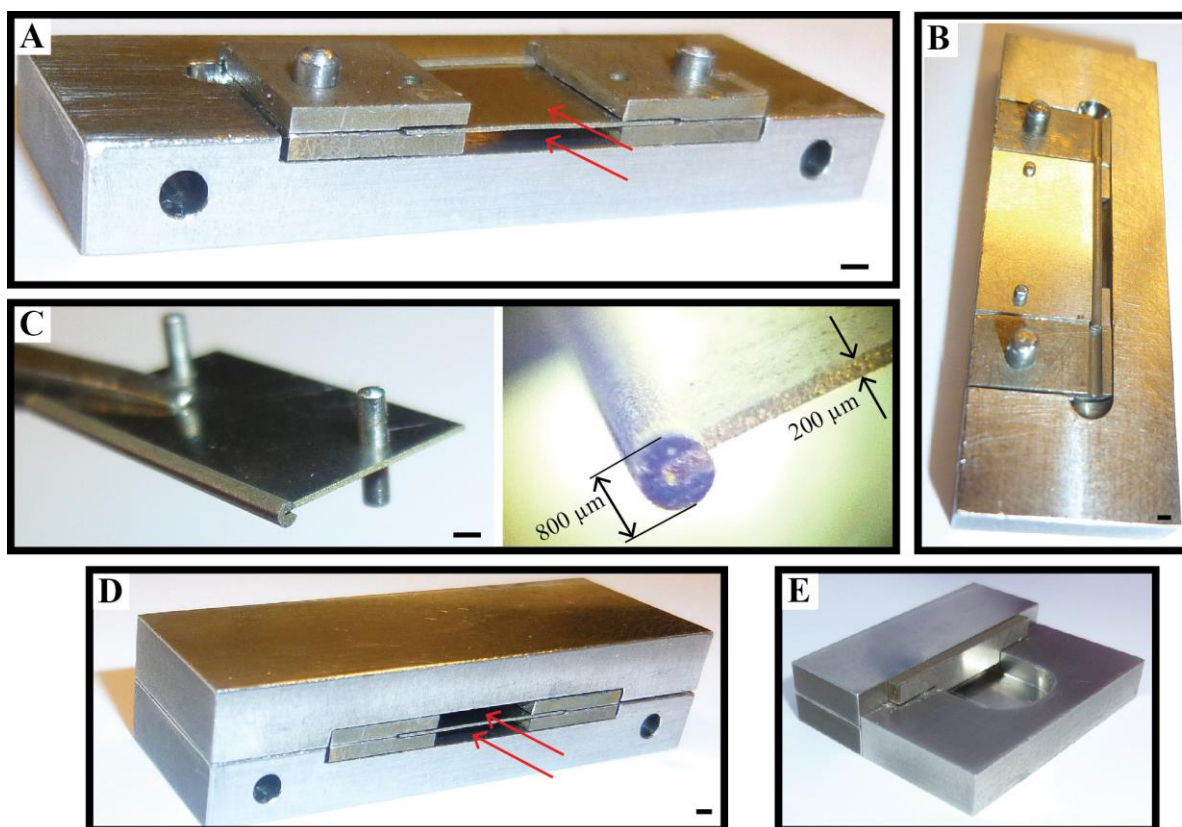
Customized mold comprising nine individualized parts, fabricated in stainless steel. A) Front view of parts 2-7. Arrows point to space for handling tabs. B) Top-side view of parts 2-7 showing part 7a fitting into dedicated grooves on parts 4 and 5. Vertical rods for mating are also visible. C) Detailed view on part 7 with all its sub-parts assembled. On the right a detailed view on a groove fabricated by electrical discharge machining in 7a, allowing 7b to be mated into it. D) Assembly of parts 1-7, with arrows pointing into the handling tabs spaces, through which PDMS is poured into the mold. E) Complete assembly of the mold. Scale bars: 1 mm.
